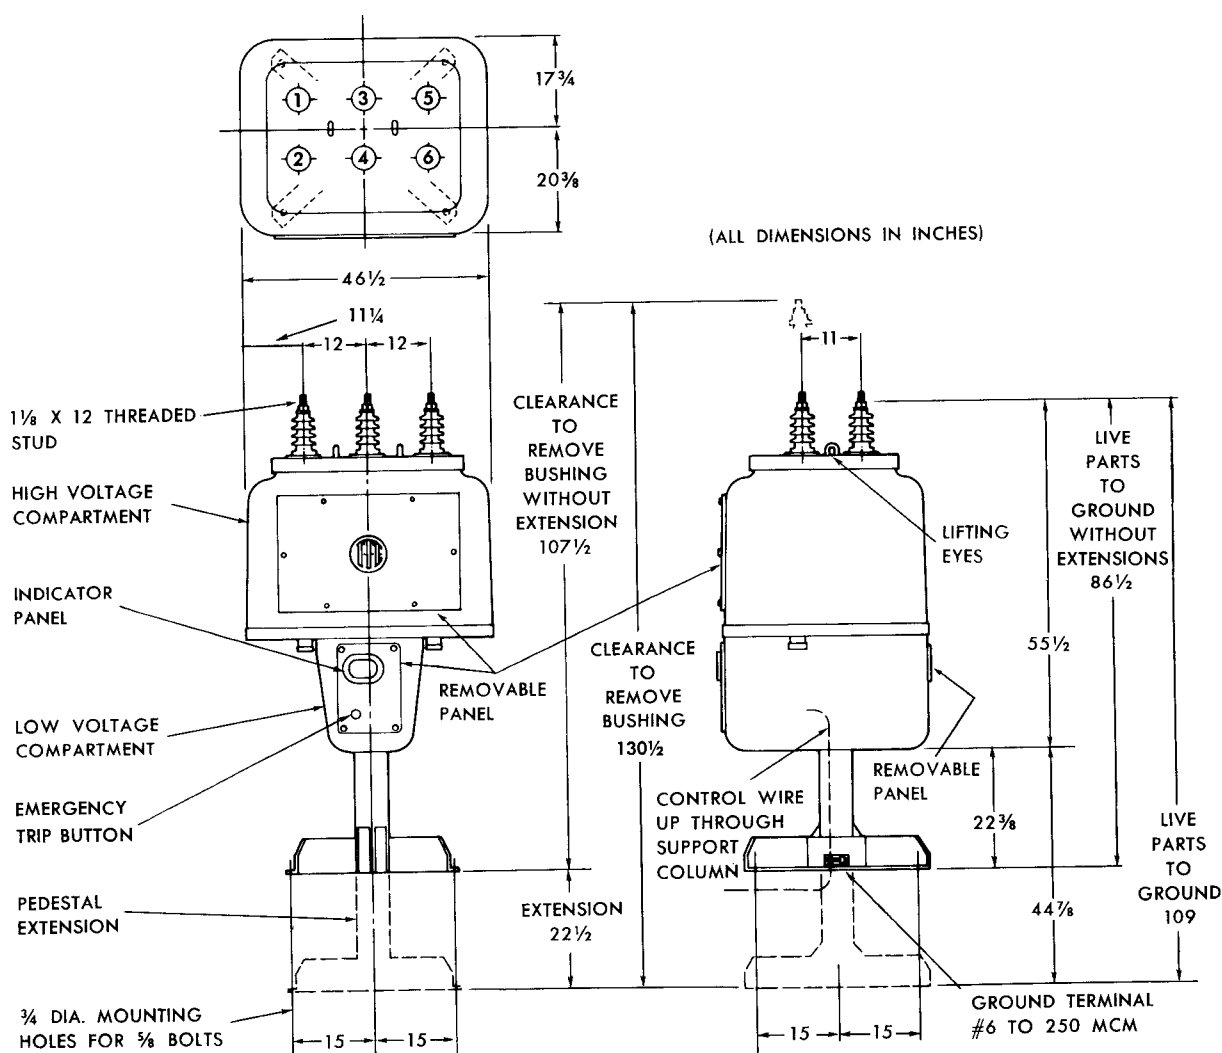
Fiberglass-Housed Model VBP Non-Relayed Basic Breaker Assembled for Station Mounting.
